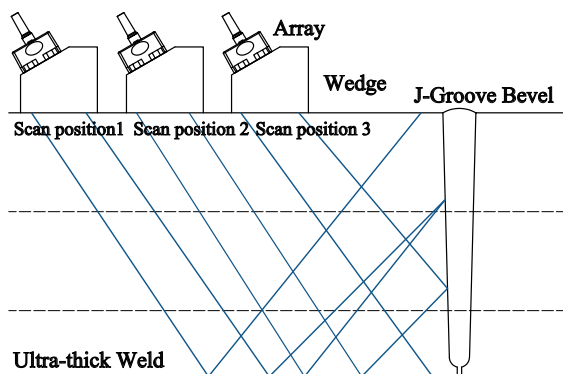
Schematic diagram of the inspection for ultra-thick welds.
